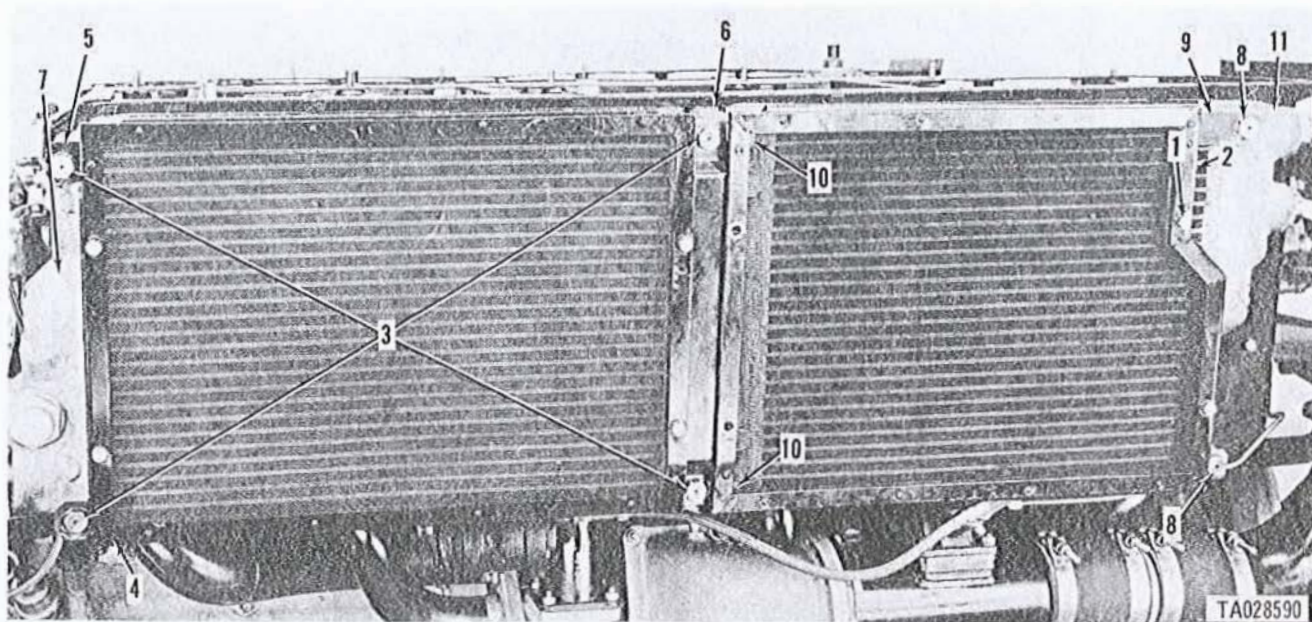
Removing or installing oil cooler oil inlet, oil outlet and vent hoses.
